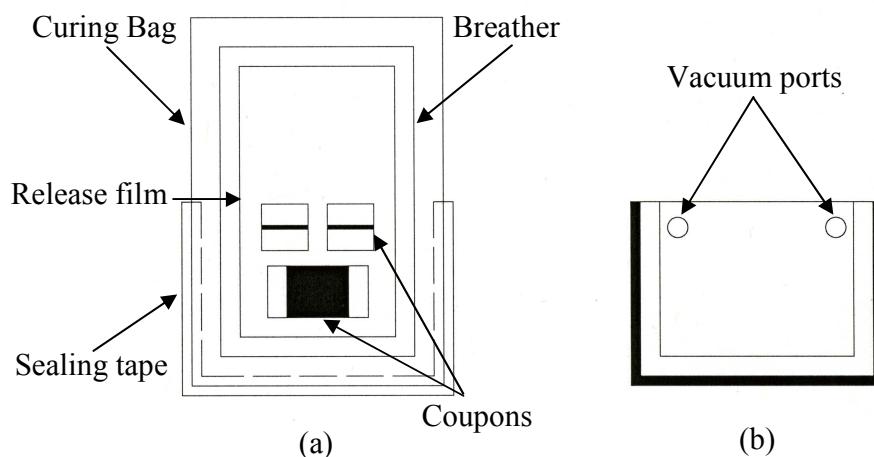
(a) Open and (b) closed envelope type bagging system for curing of the adhesive bonding layer between the material-test laminates and the tabs.
